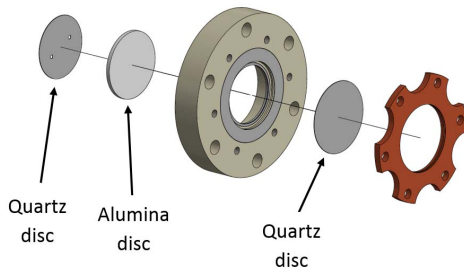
Technical drawing of the multilayer window and Conflat flange.
